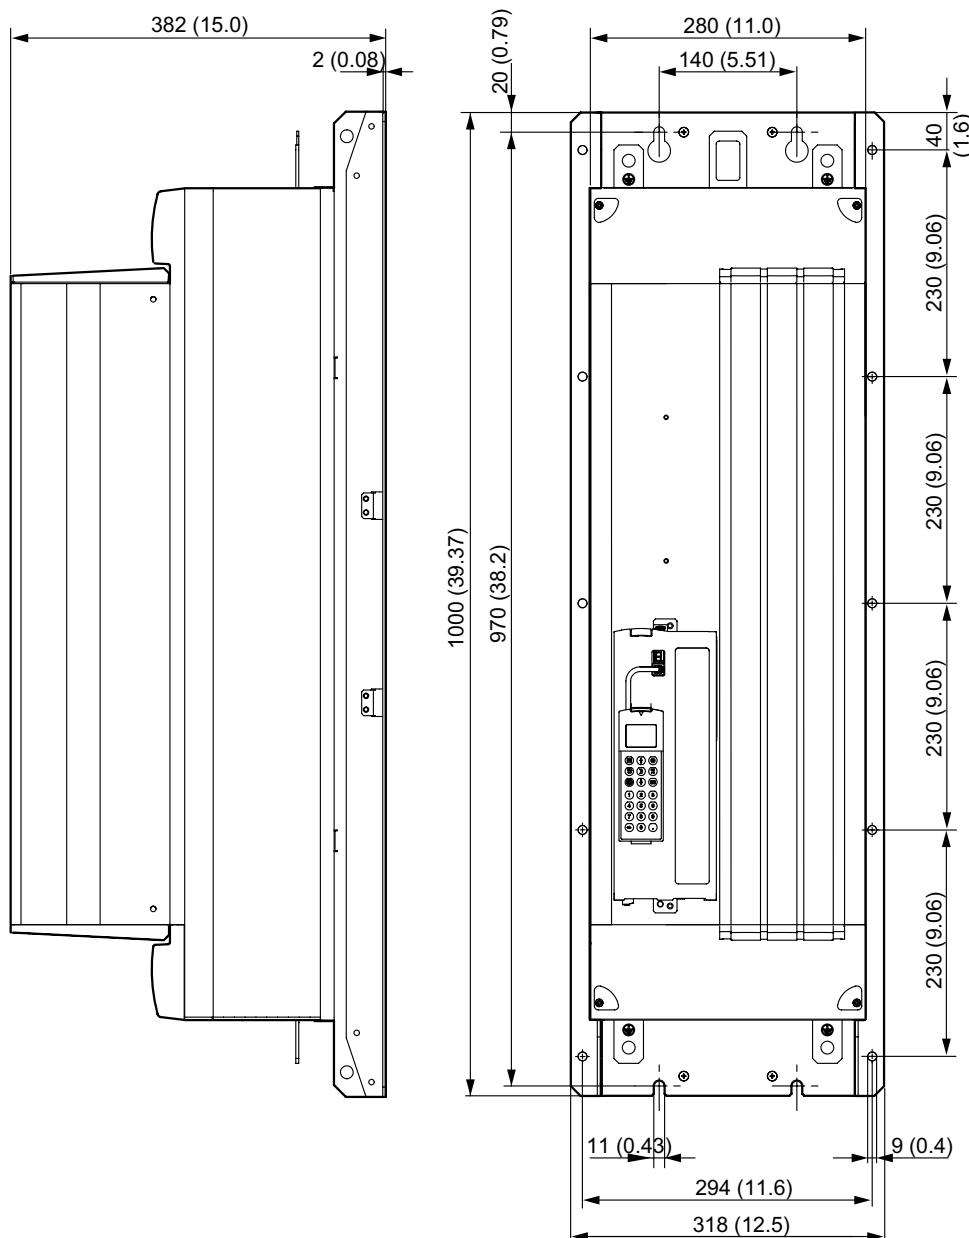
Dimensions for MDX61B size 5, dimensions in mm (in)
